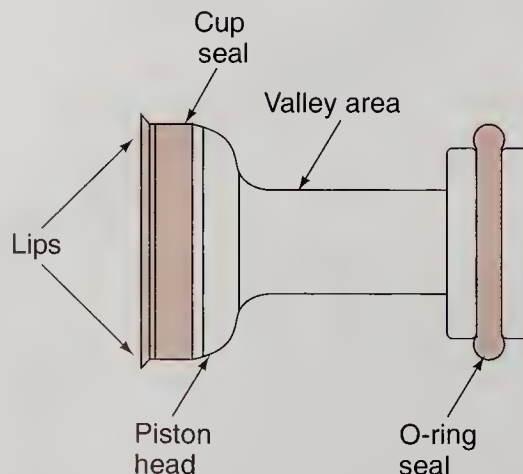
A cup seal and O-ring seal the piston in the cylinder bore.
